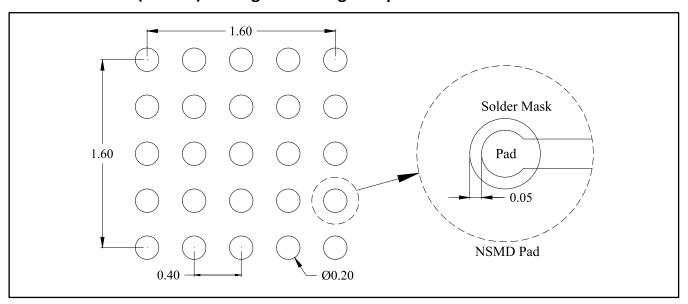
WLCSP 25B 2.1mm × 2.2mm package soldering footprint (NOT TO SCALE)
